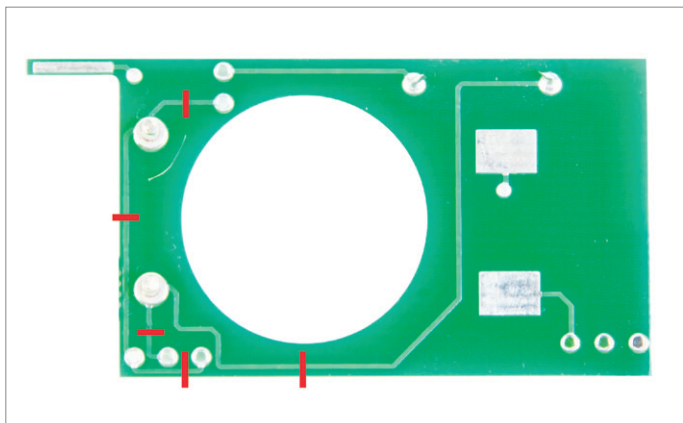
Cutting strip conductors on the universal PCB, soldered batteries
